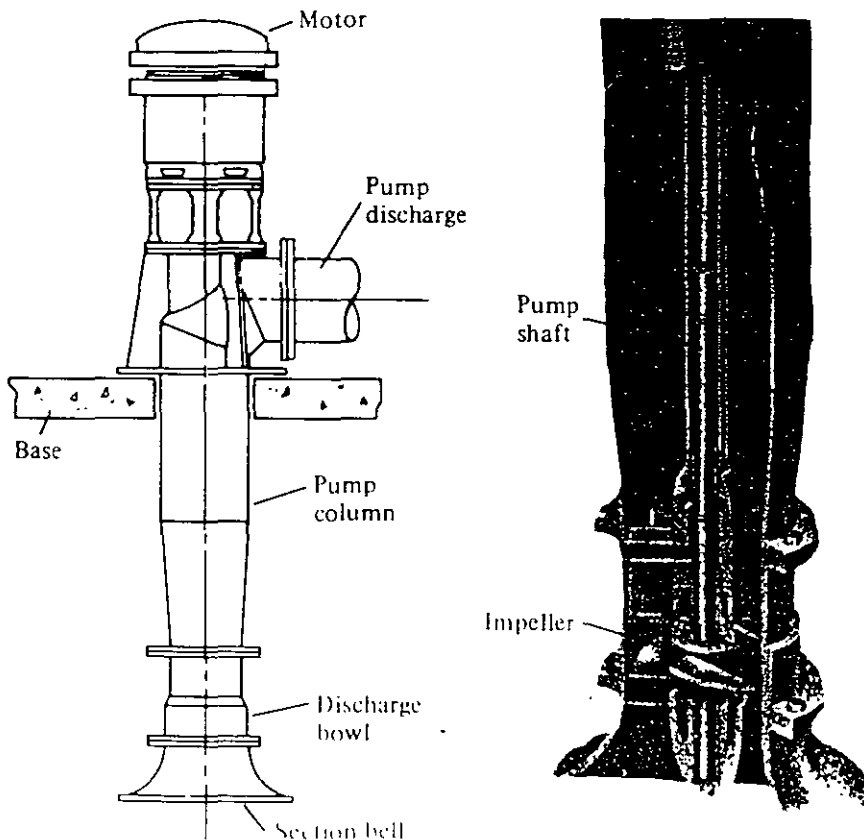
Axial flow centrifugal pump (Courtesy Johnston Pump Company)
